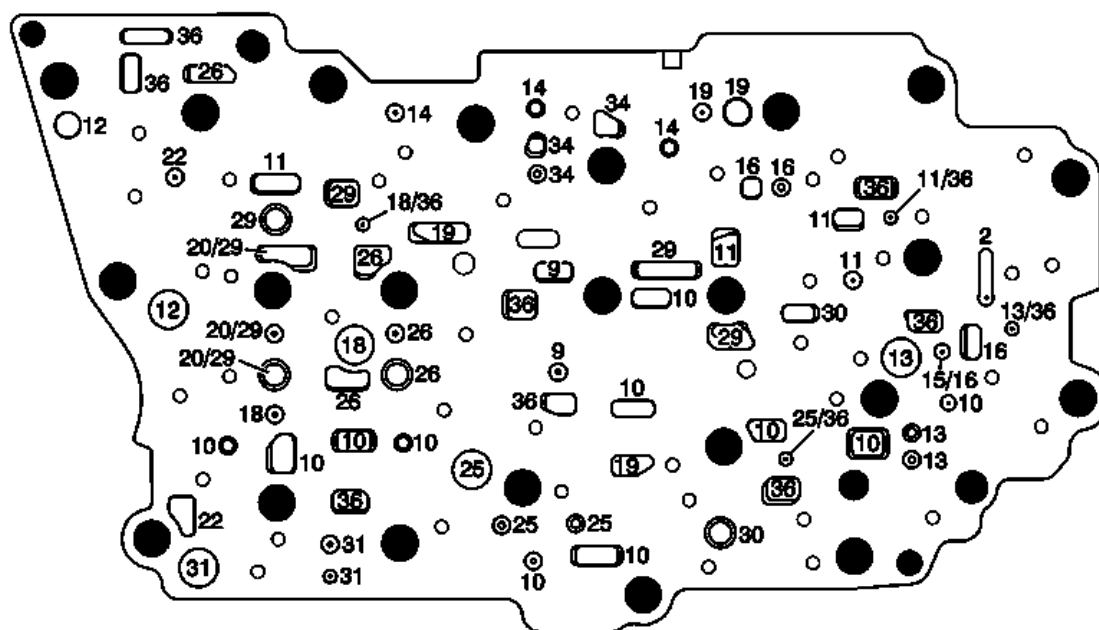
Channel Plate to Valve Body Spacer Plate Assembly -- Channel Plate Side
